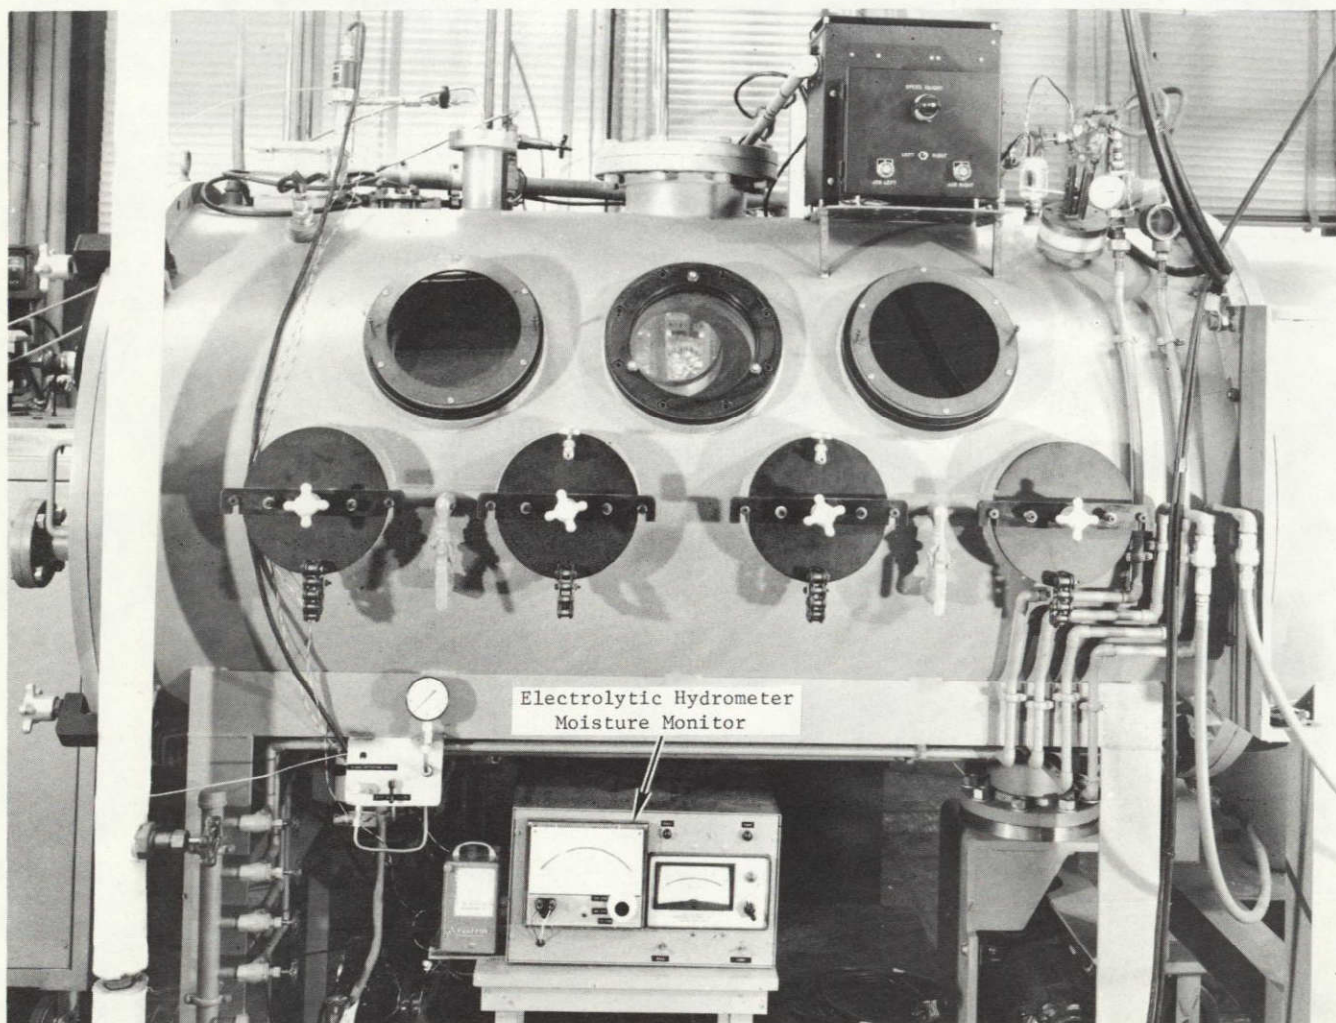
Vacuum Purged Inert Atmosphere Welding Chamber - 3 Ft Diameter x 6 Ft Long. (C65040928)
